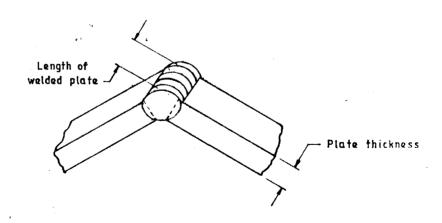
Forms of joint for fillet weld specimen
